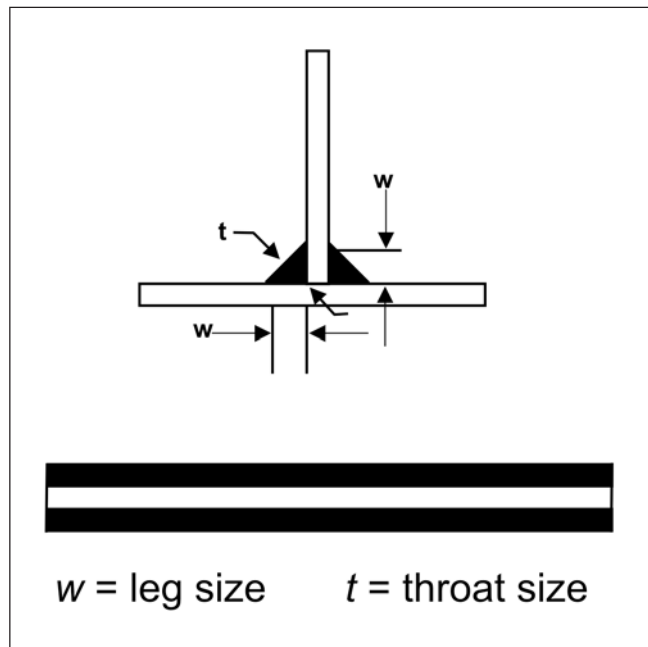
Continuous welding of attaching the stiffeners to plating.
